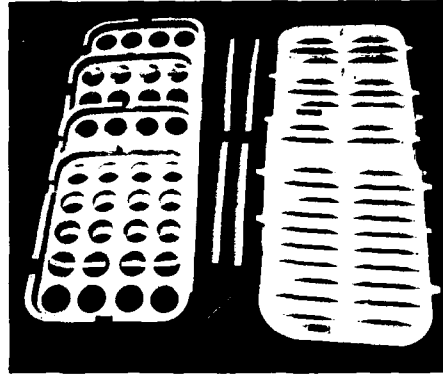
Parts out of 2091 before assembling access doors, type A 31290-402
